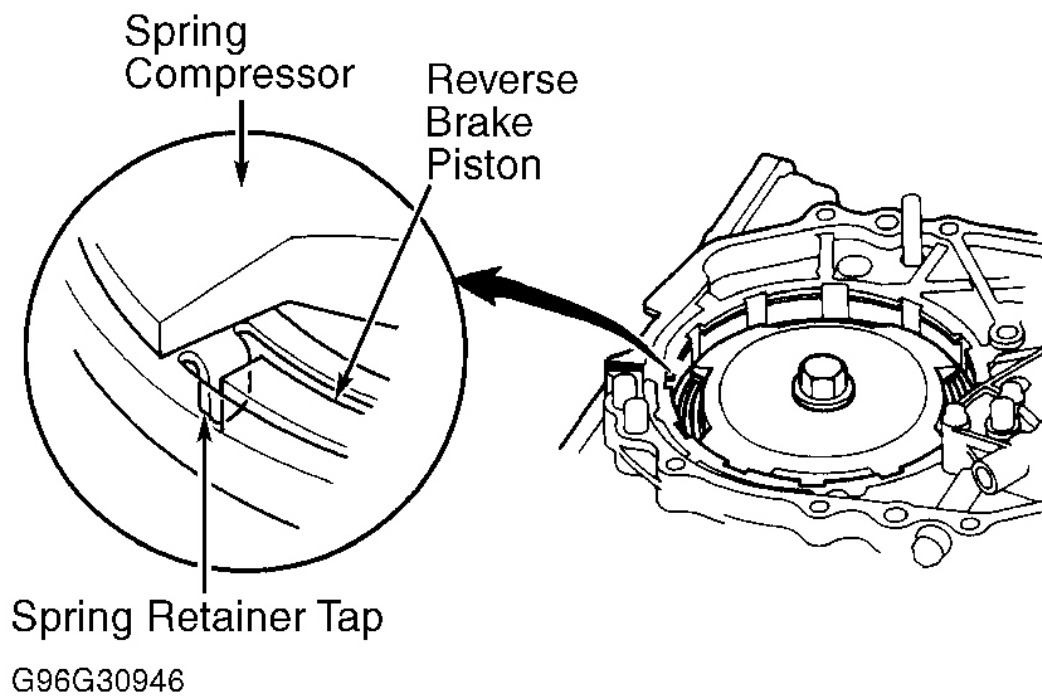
Positioning Spring Retainer On Reverse Brake Piston
